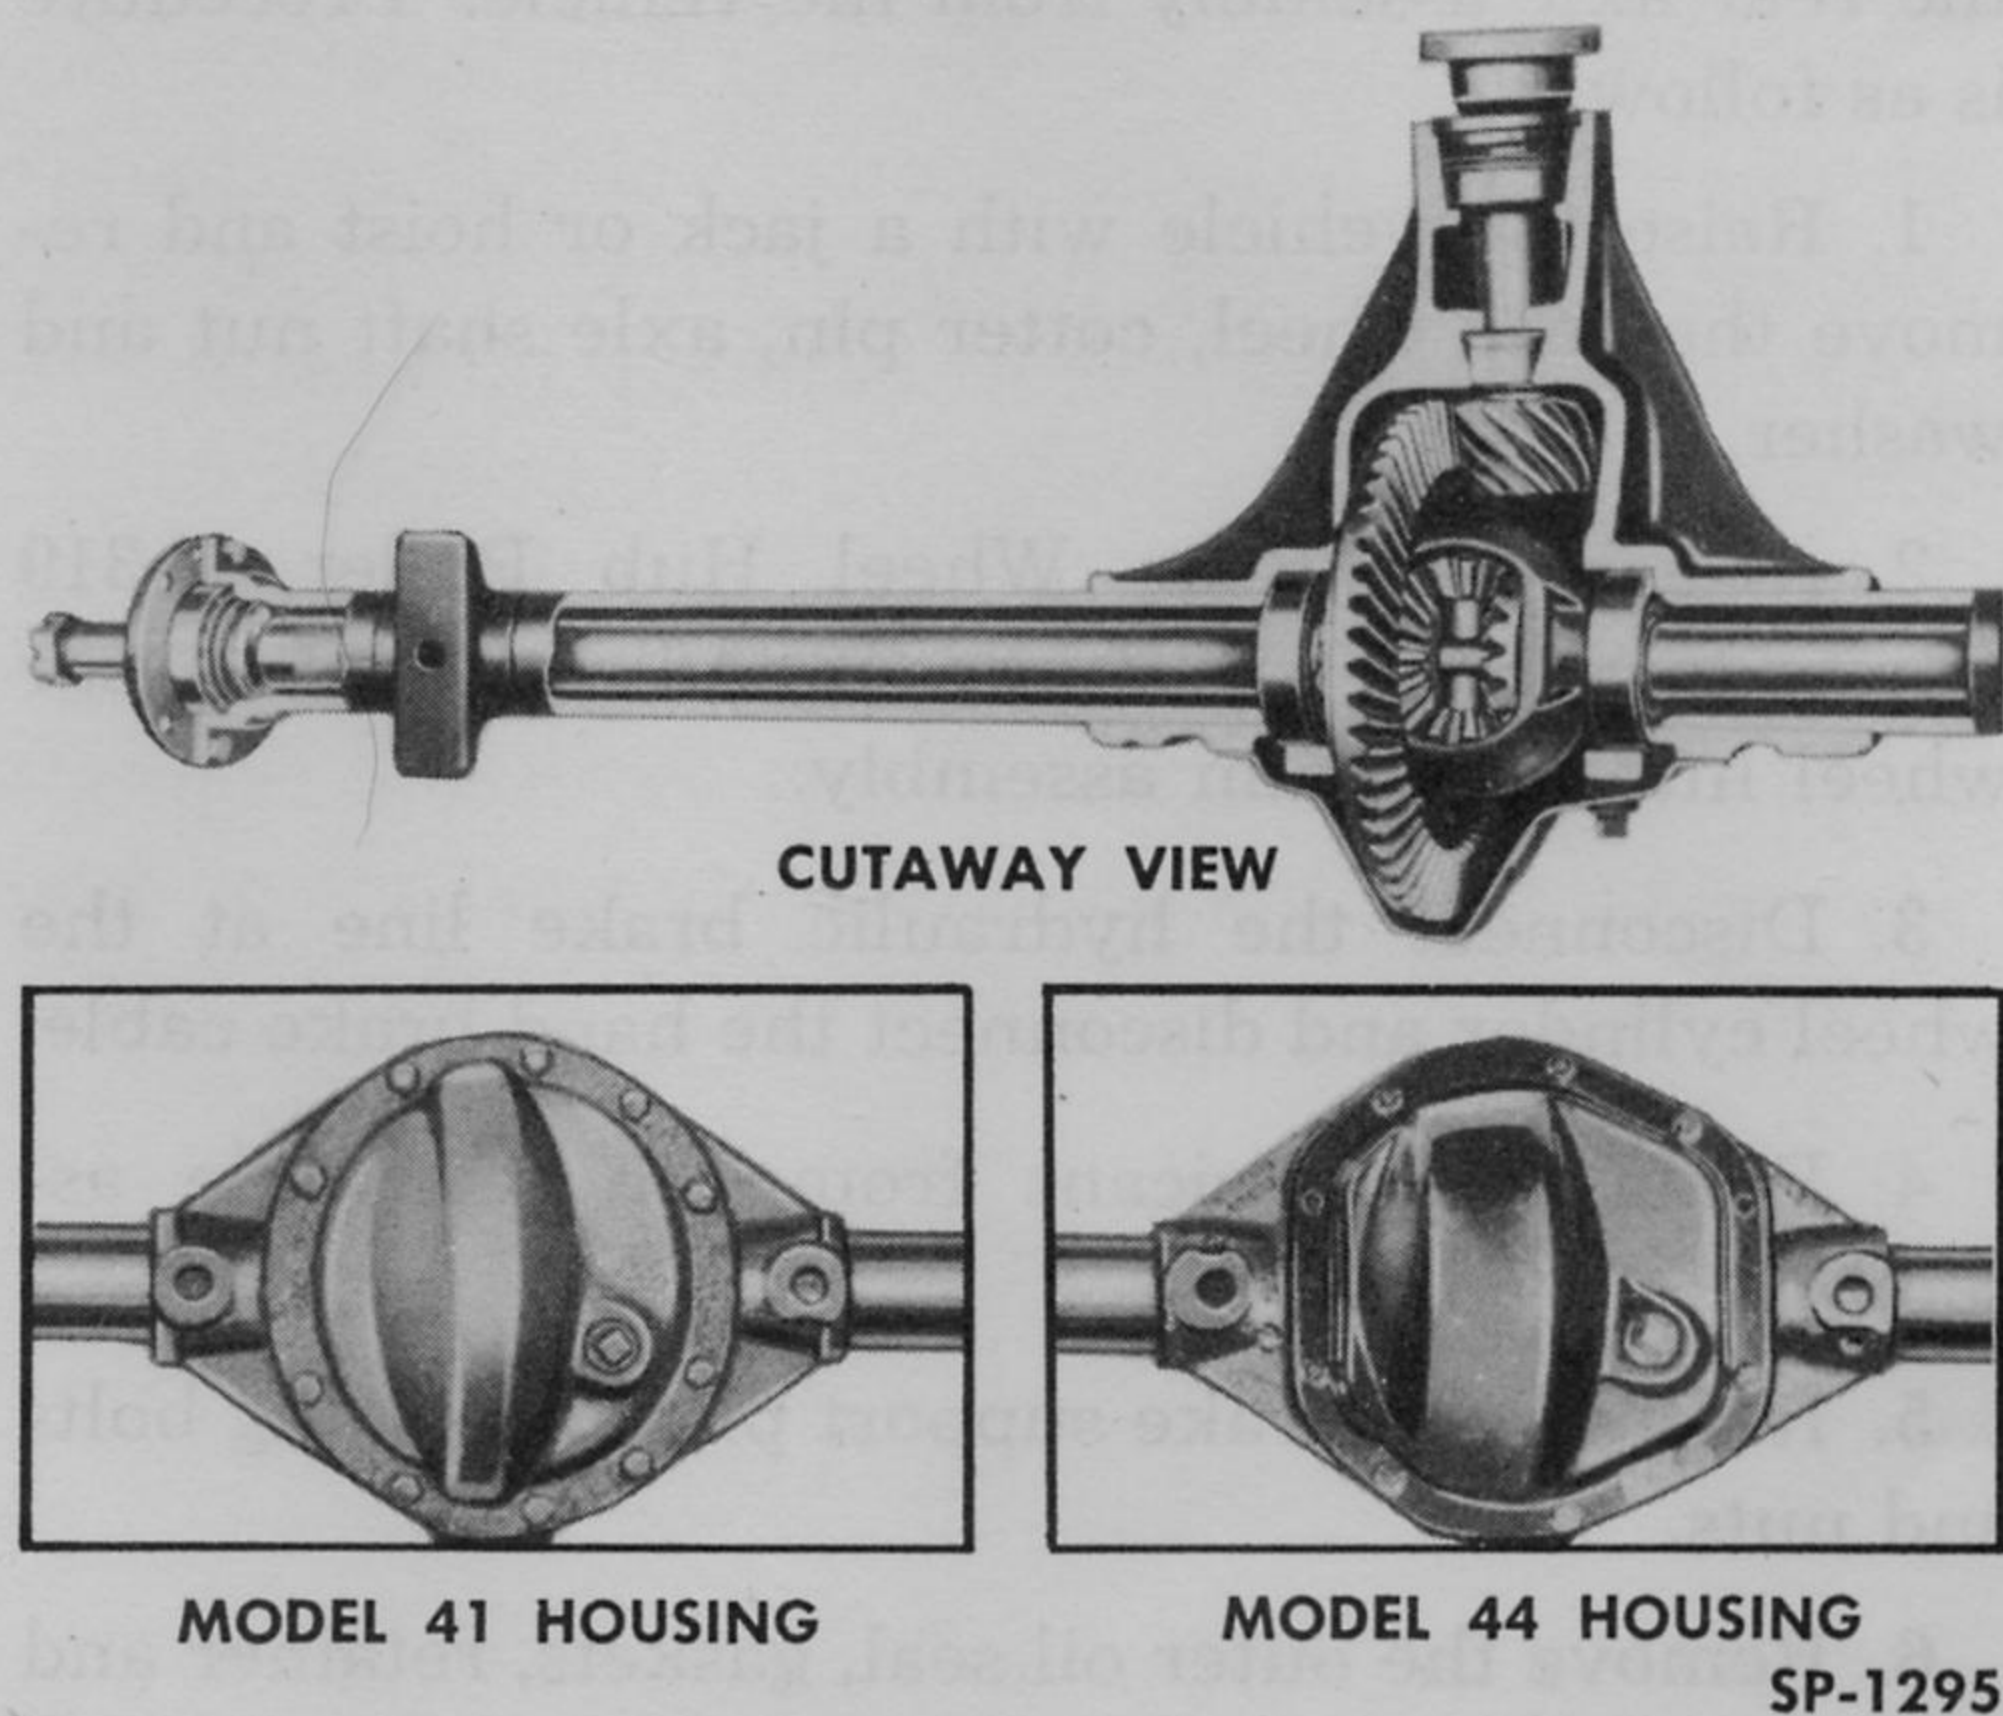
Rear Axle Assemblies—Models 41 and 44
